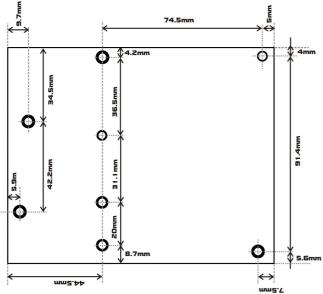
RF module drill template, all measurements in mm, all holes are for M3 metric screws. Board is 10mm above the enclosure due to heatsink running under the entire length of the board.
